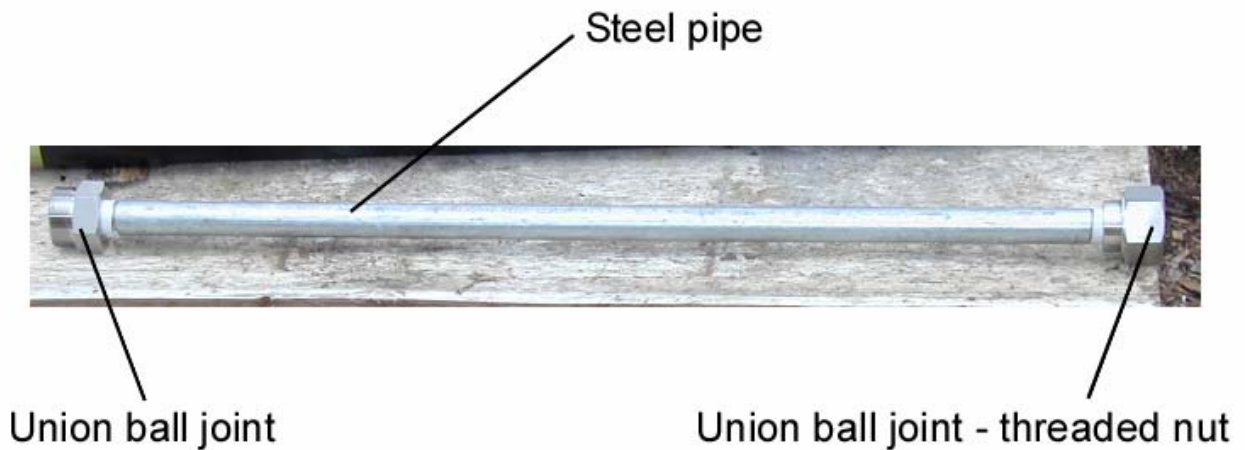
Photograph of an extension rod with parts of the union ball fitting connected on each end.
